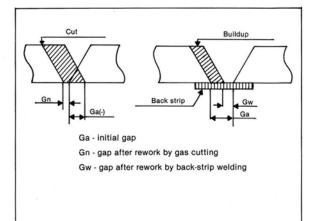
A/C is most effective when it focuses on minimizing the two kinds of rework commonly encountered when joining hull blocks, i.e., gas cutting and back-strip welding.
